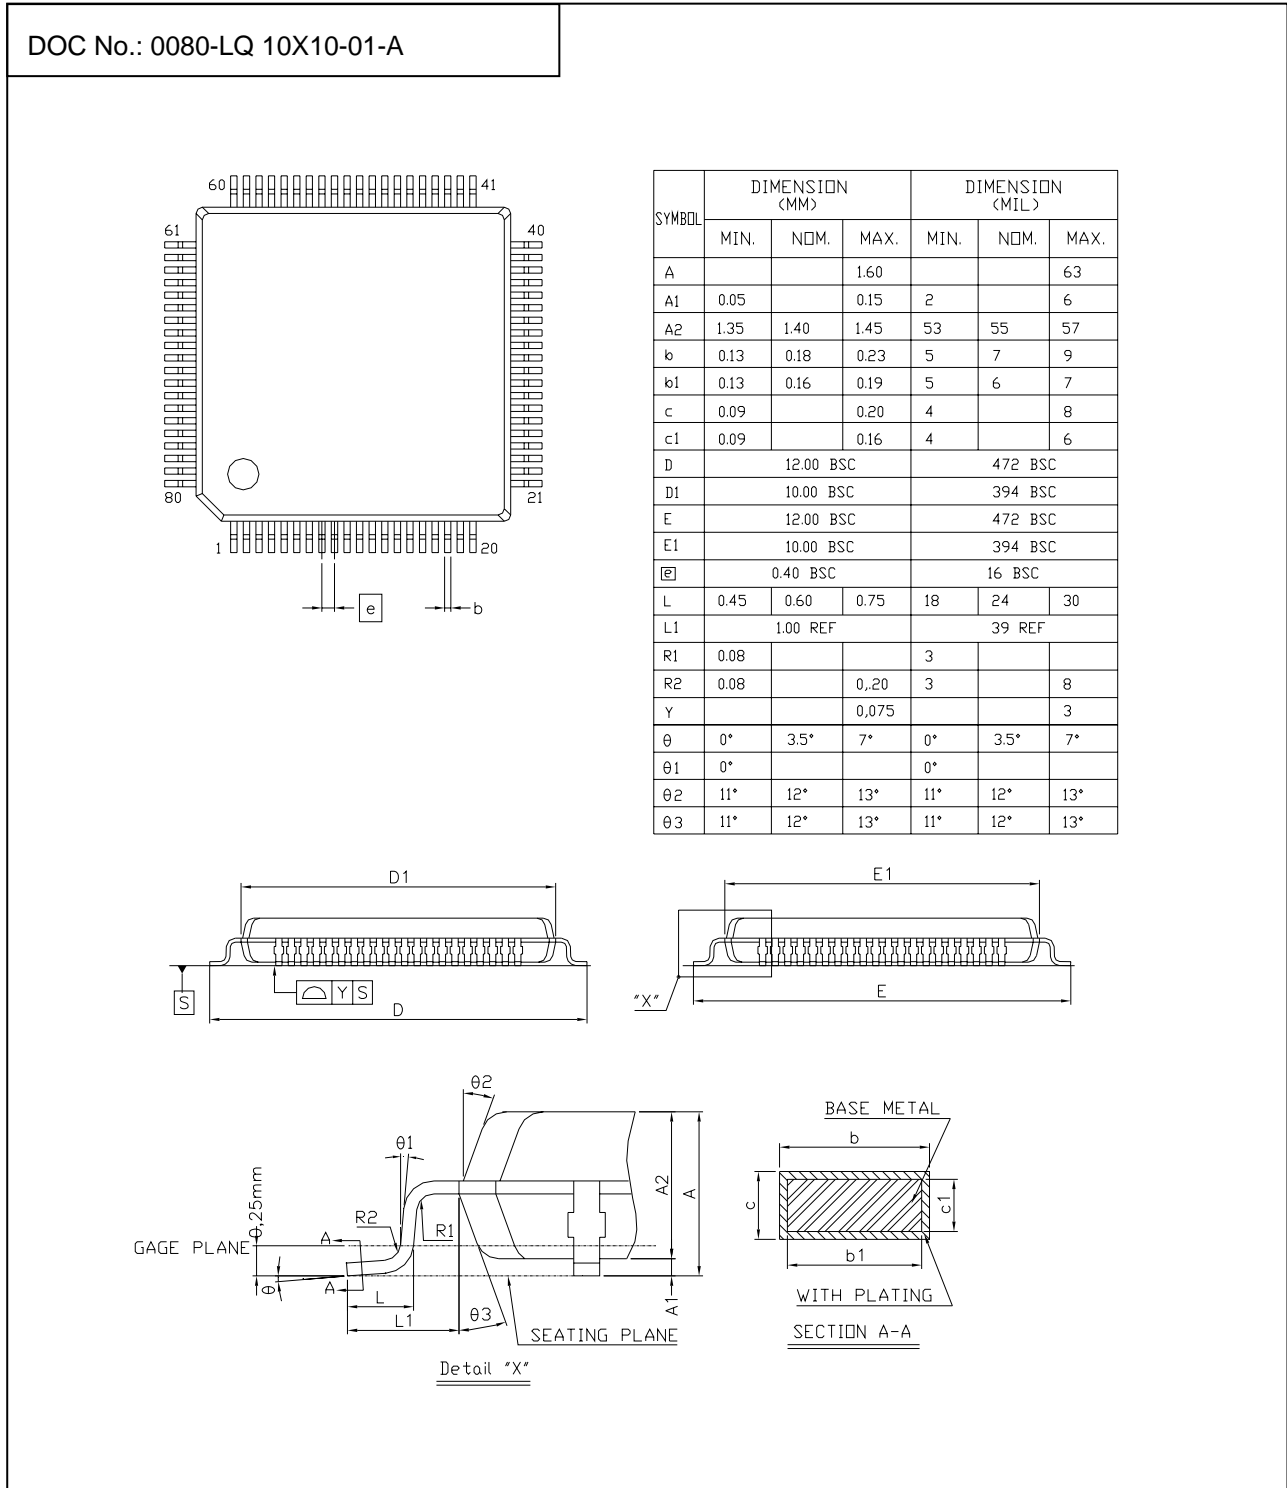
80 Pin LQFP 10.0x10.0x1.4 mm Package Outline Dimension
